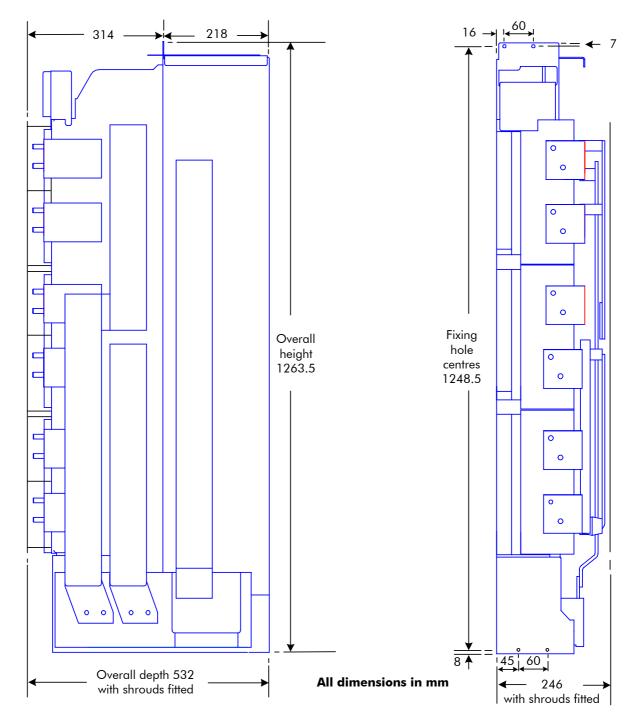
Outline and Fixing Dimensions for a Rectifier Bridge Module
